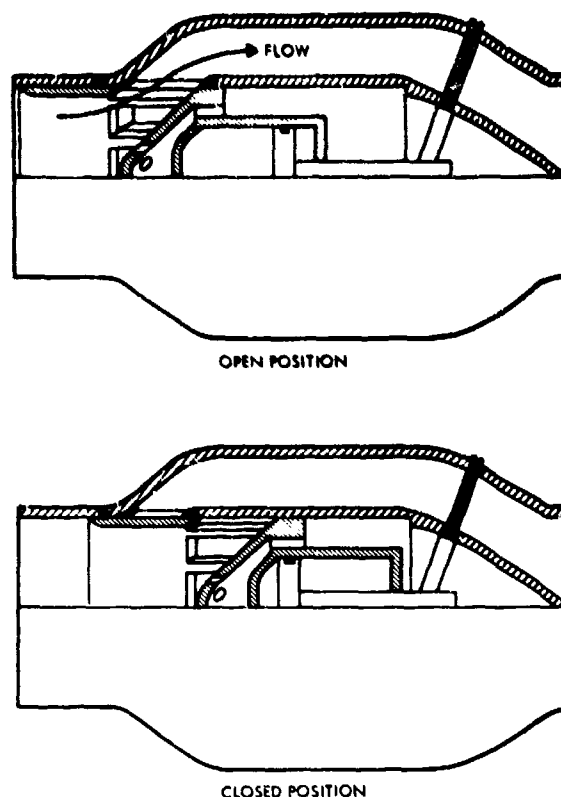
Sleeve Valve with Seals in Housing
